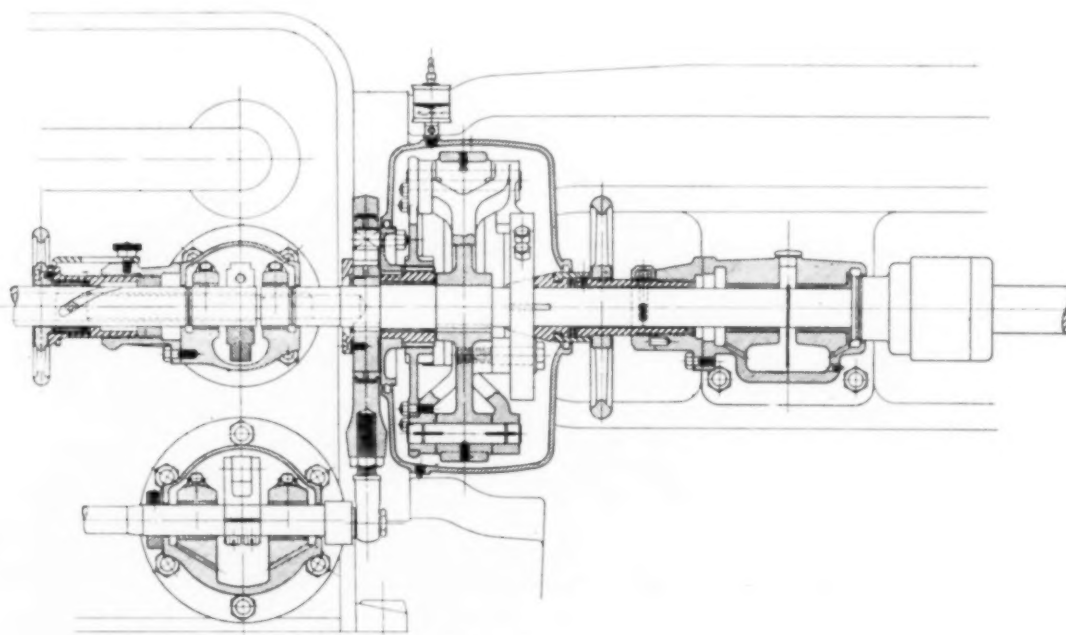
SECTION OF VALVE CAMS, GOVERNOR AND HAND SPEED ADJUSTMENT
